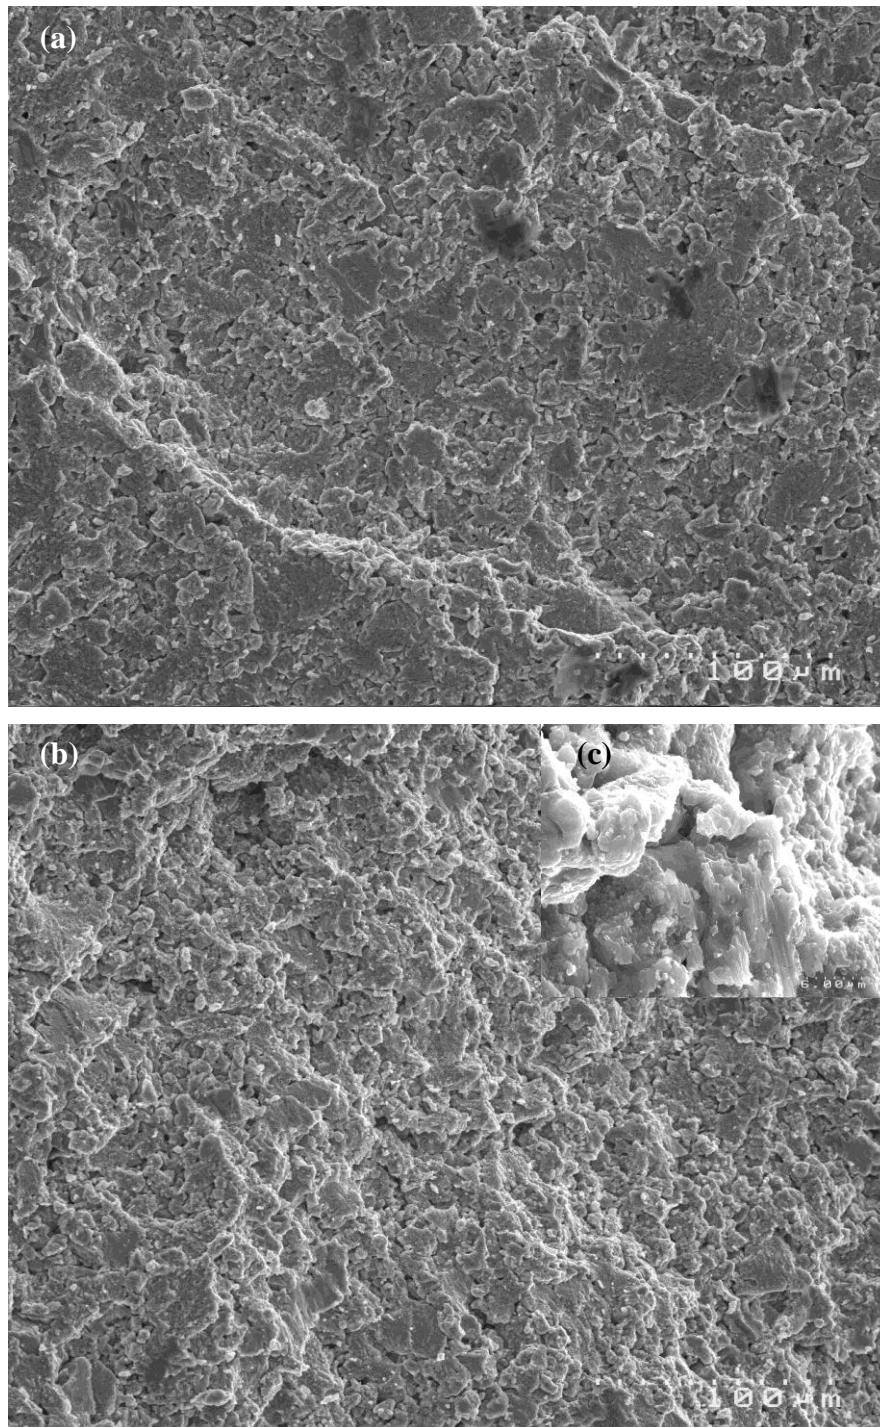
Fractured surfaces of the samples after compression testing: (a) quasi cleavage type of fracture; and (b) regions showing ductile behaviour; (c) ductile region.
